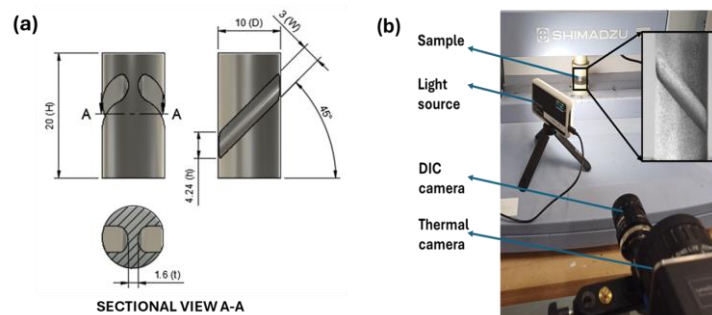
(a) SCS geometry with side view and sectional view A-A (b) Experimental setup
